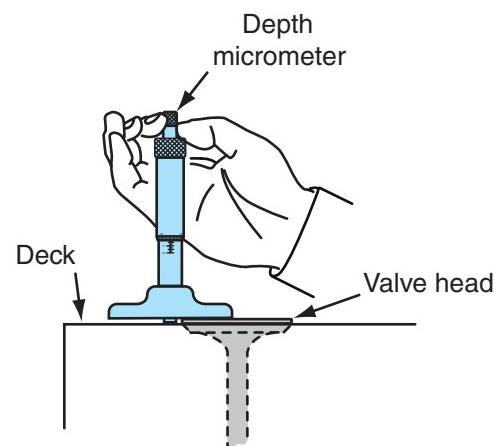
Measuring valve protrusion with a depth micrometer.
